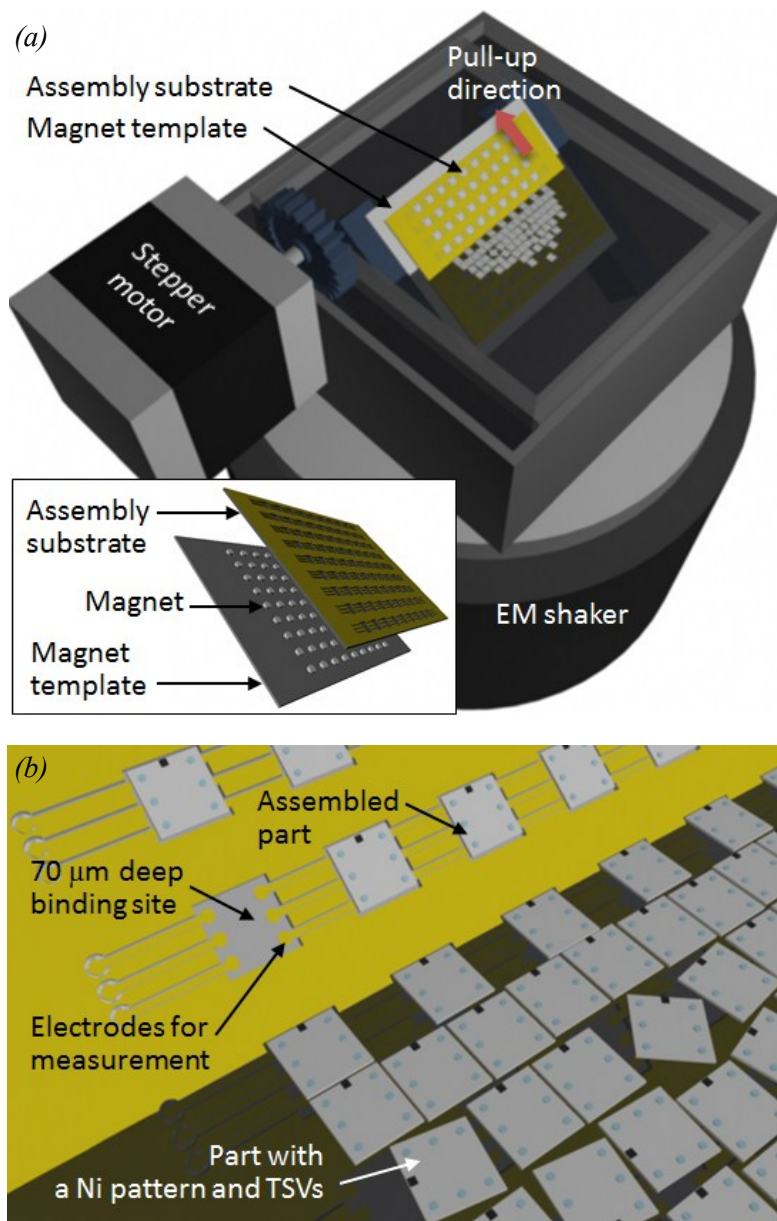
Assembly system. (a) Experimental setup for assembly consists of a water container on a linear electromagnetic shaker, a stepper motor with the controller, a substrate and parts floating at an air-water interface. (b) Design of parts and binding sites. Each part has six TSVs (diameter = 200 μm) and each binding site has six electrodes for electrical measurement.
